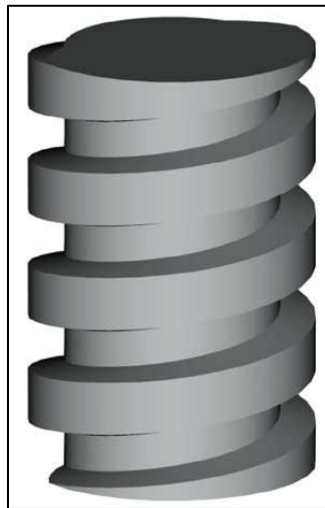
FRONT VIEW OF EXTERNAL THREADS
